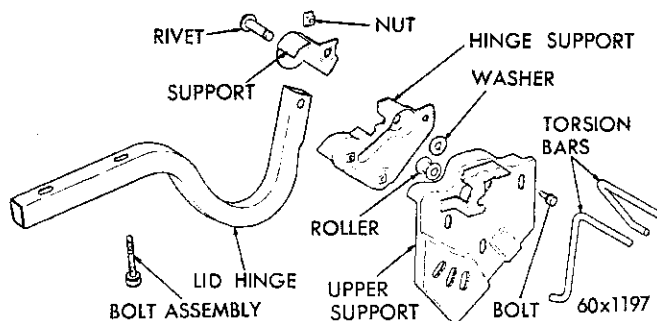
Disassembled Torsion Bar and Deck Hinge Assembly
